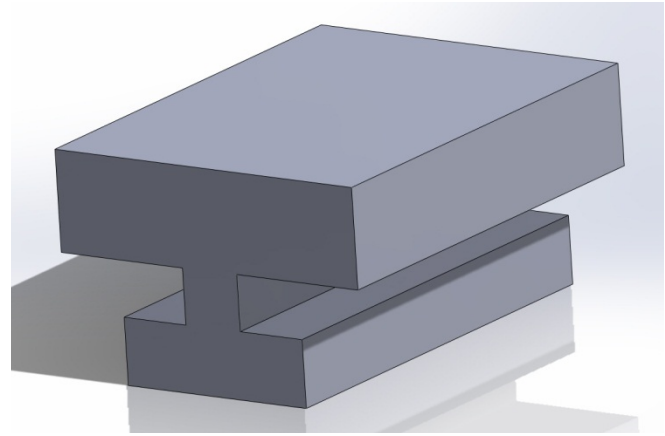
Plastic carriage used for translational motion and attachment of screw mechanism
